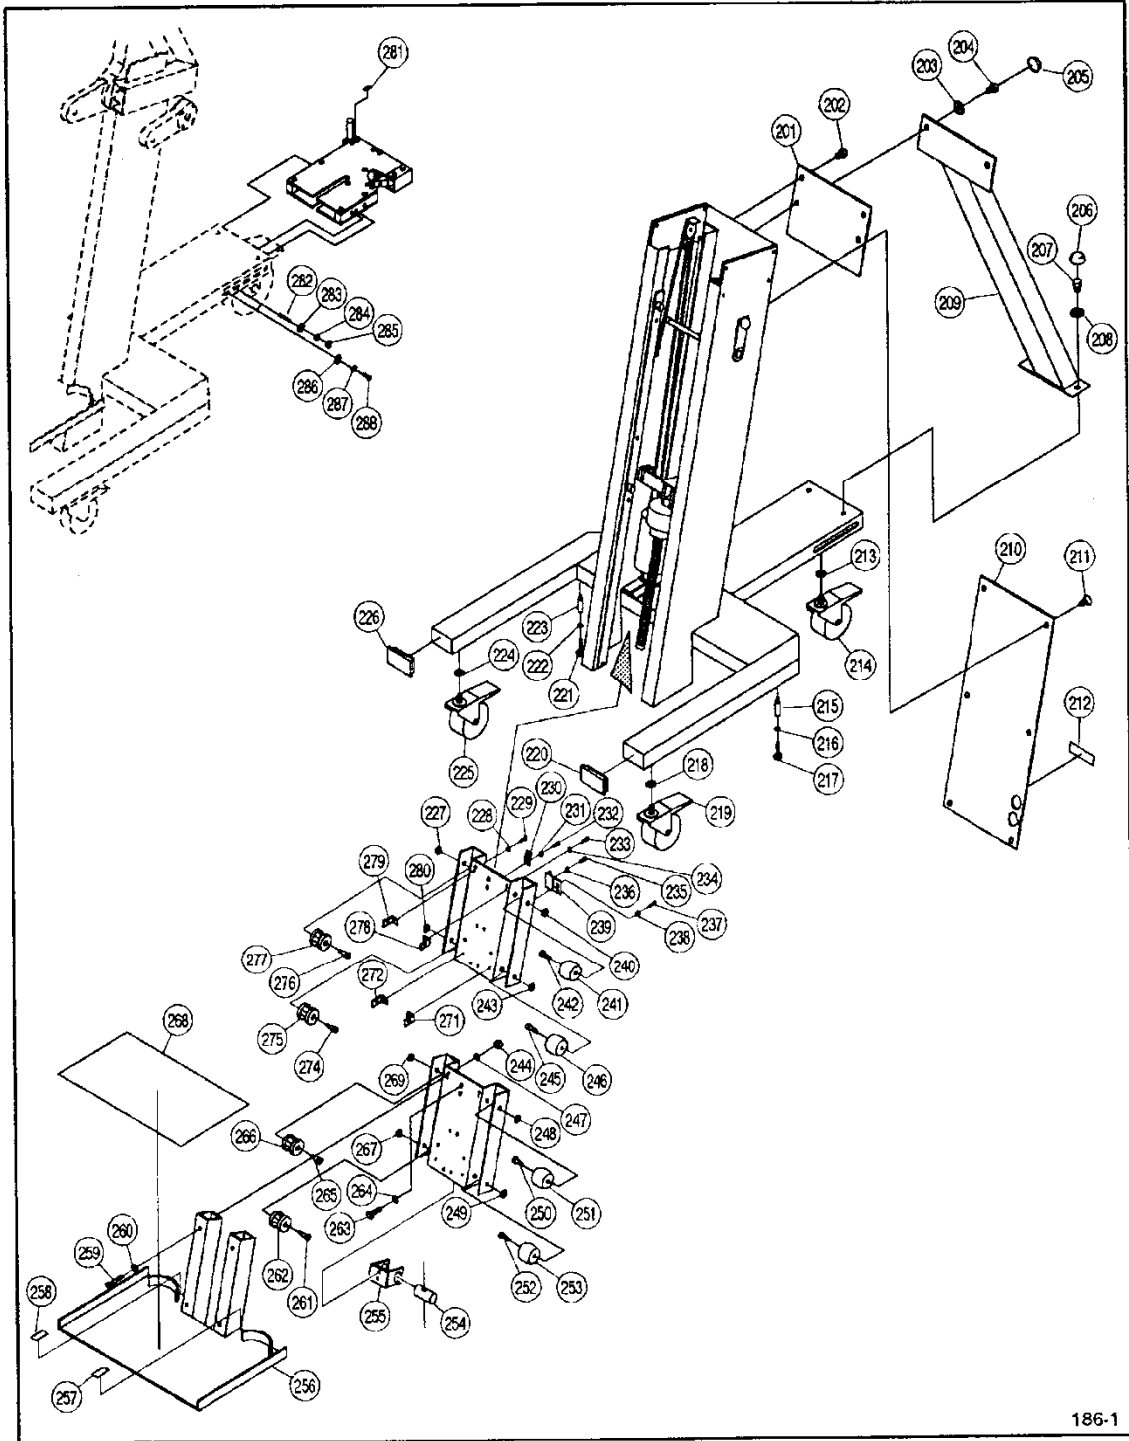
Roller/Footplate Carriage, Rear Strut, Docking Adapter Assemblies.
